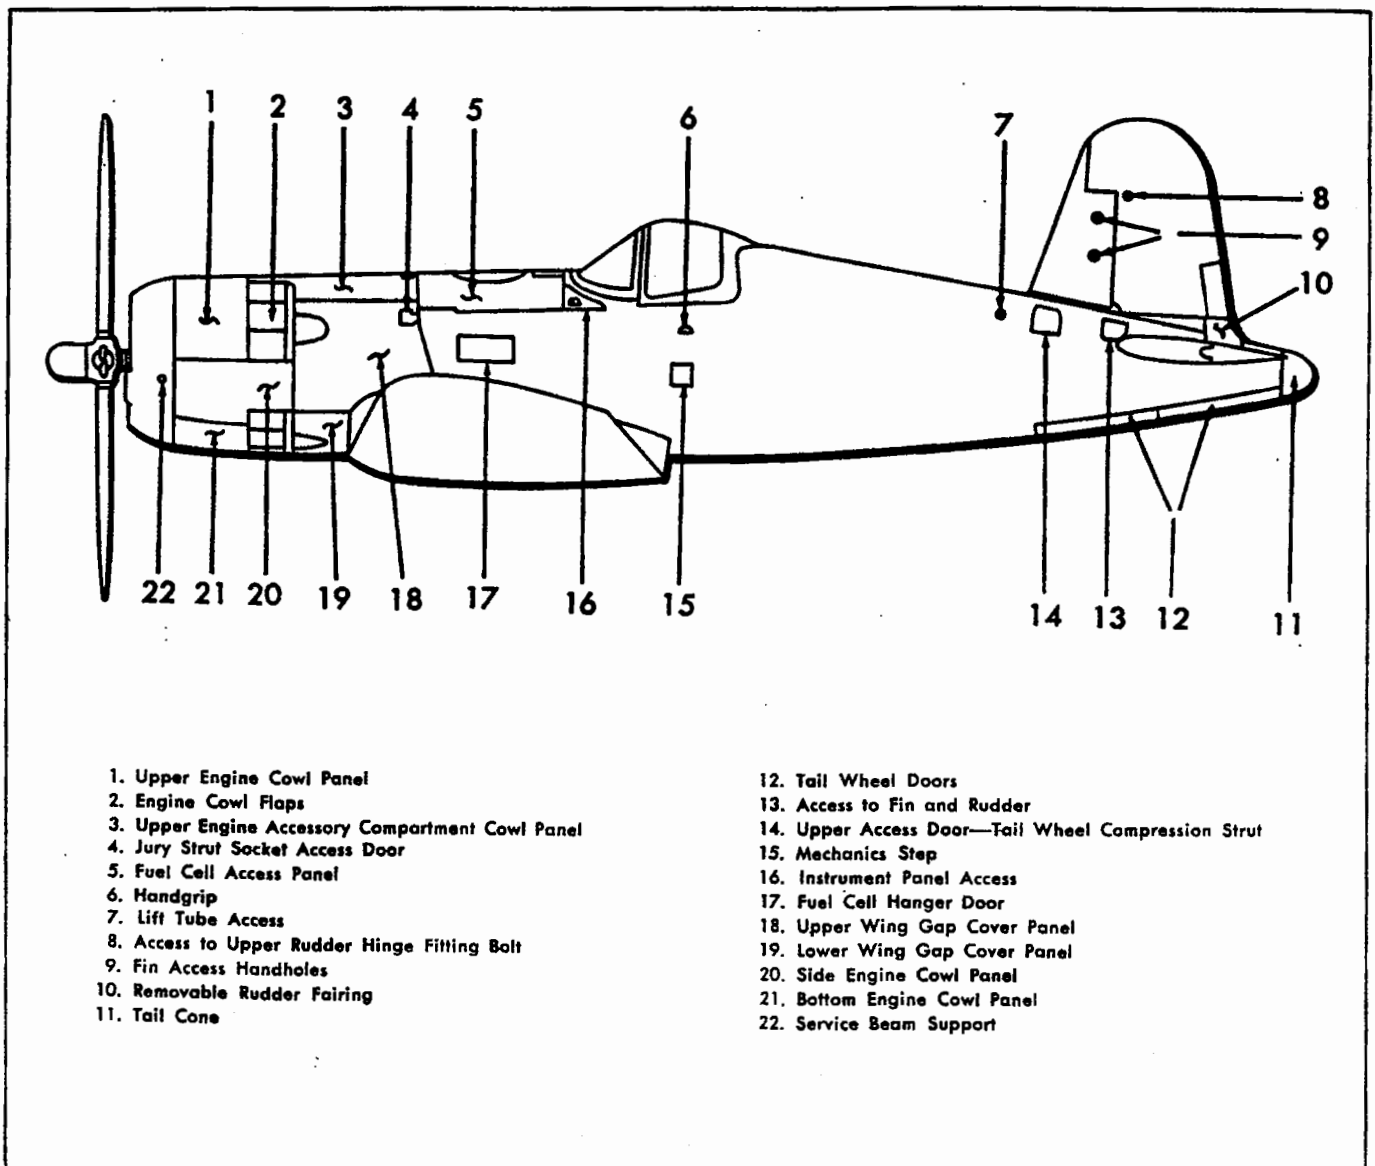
(Sheet 1 of 4 Sheets). Access and Inspection Provisions — Left Hand Side.
